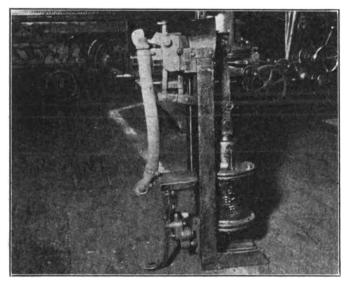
Foot-Operated Machine for Cutting Clamp Bolts
